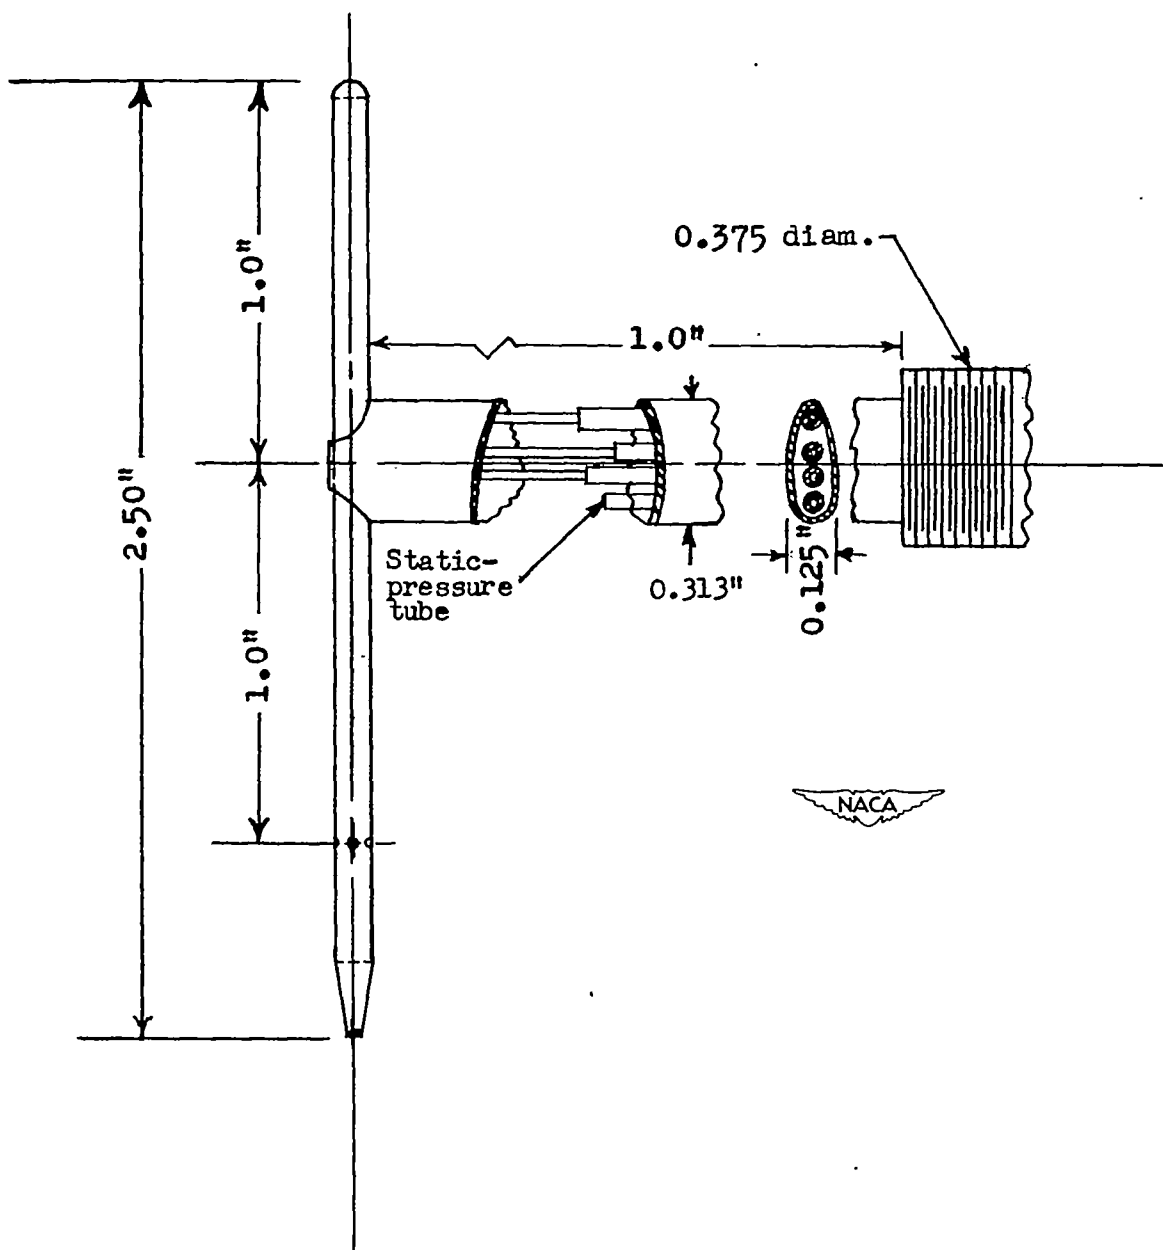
Details of prism-type combination probe designed for mounting on a rotor.
